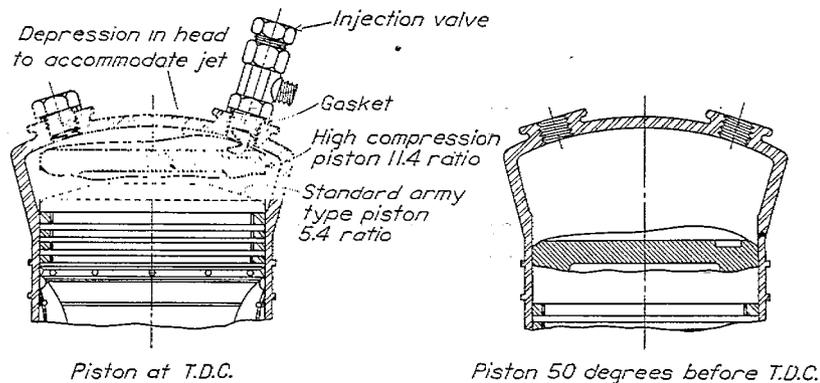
Single-cylinder Liberty engine form of combustion chamber
